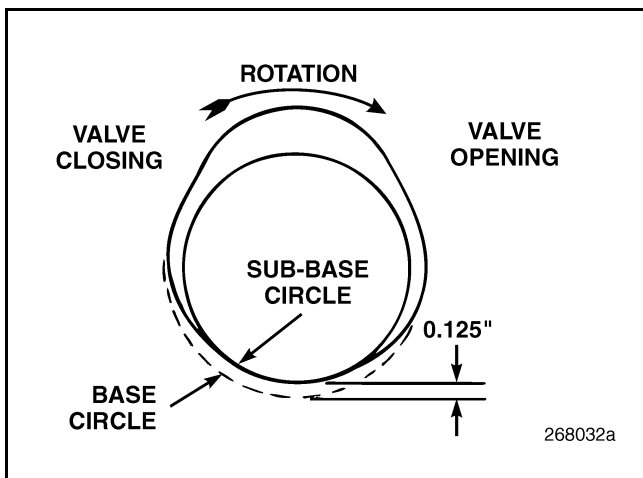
MACK Engine Brake Exhaust Lobe Profile
